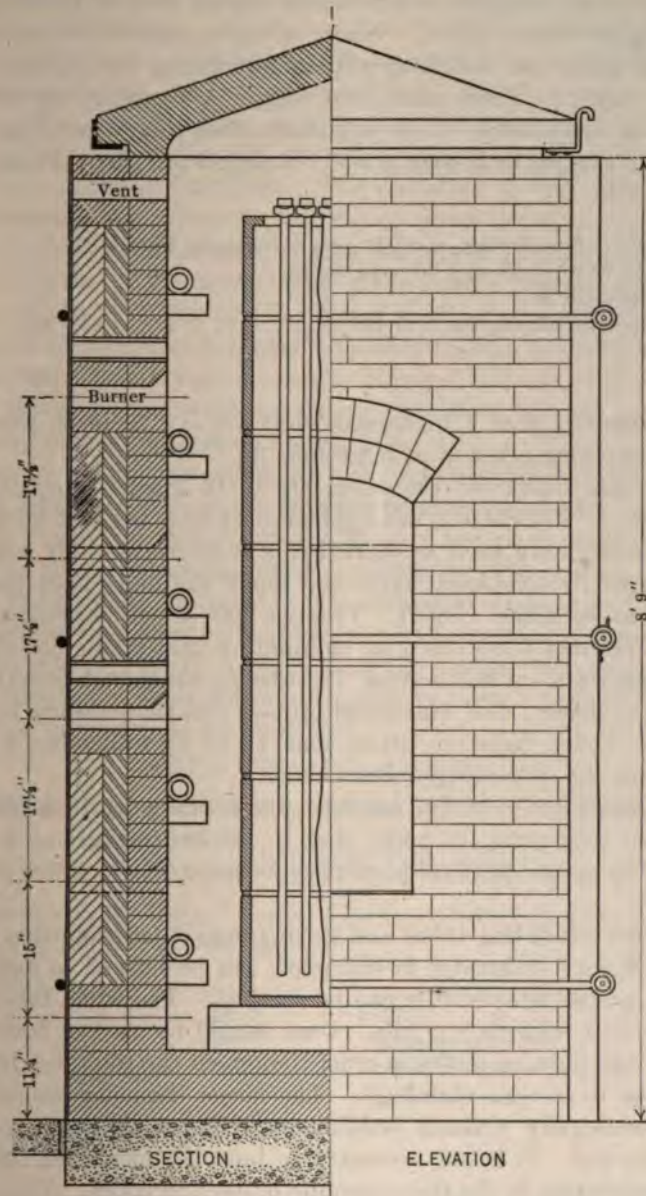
SECTION OF FURNACE FOR BURNING TUBES.
